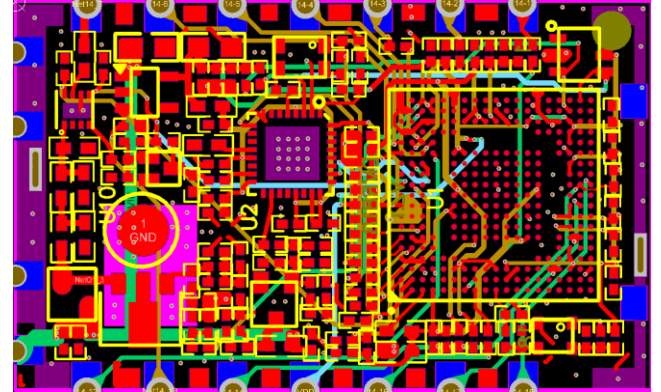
The 6-layer colour-coded PCB design of the RFU.
